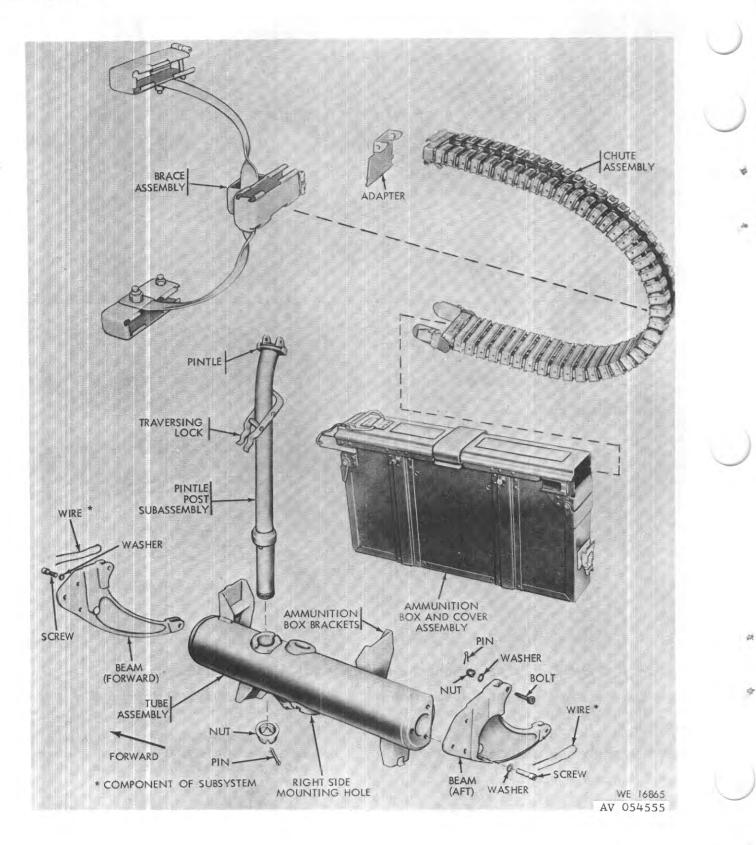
Armament subsystem M23 mount assembly - exploded view
